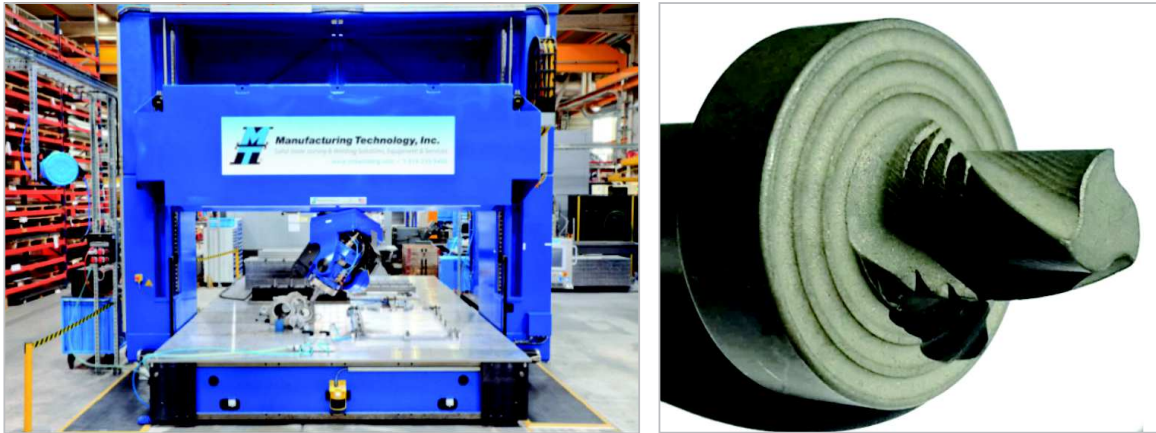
MTI GG-1 multipurpose FSW machine and final tool design made from Nimonic® 105
